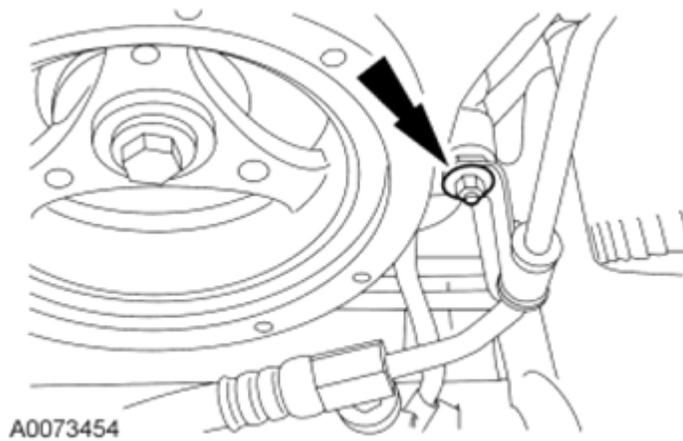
Locating Power Steering Pressure Tube Support Bracket Nut
